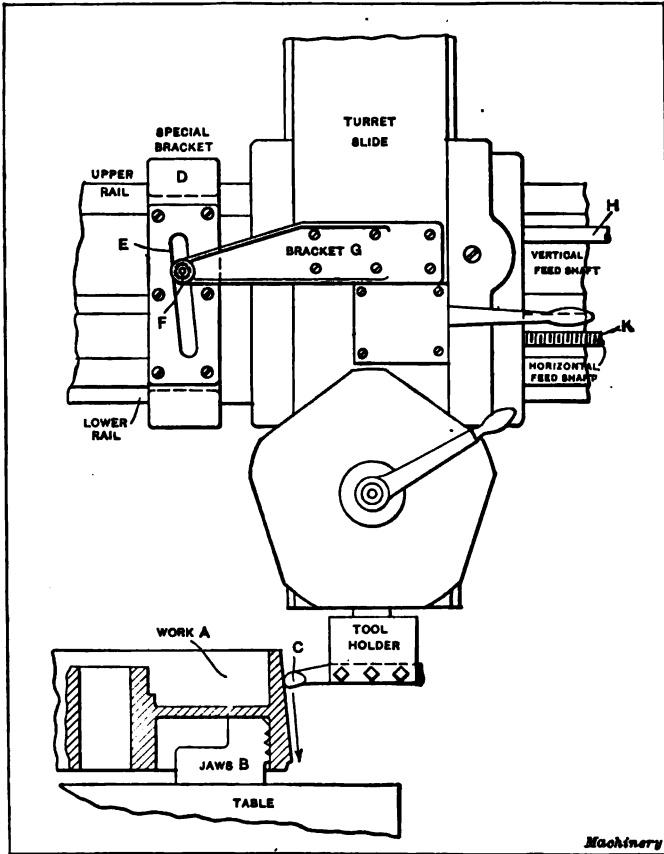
Angular Forming Attachment for a Vertical Boring Mill
